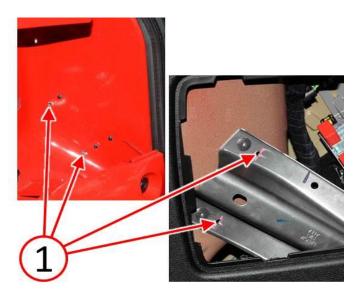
Drill Two Rivet Holes Through Each Support Bracket
